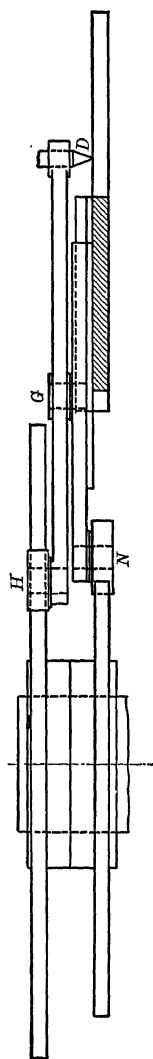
PROBLEM 19, FRONT VIEW OF CAM MECHANISM
